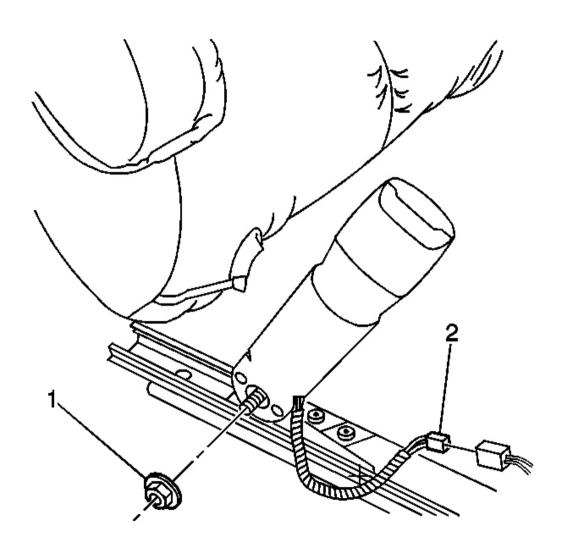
Inboard Seat Belt Buckle, Nut & Electrical Connection Courtesy of GENERAL MOTORS CORP.
